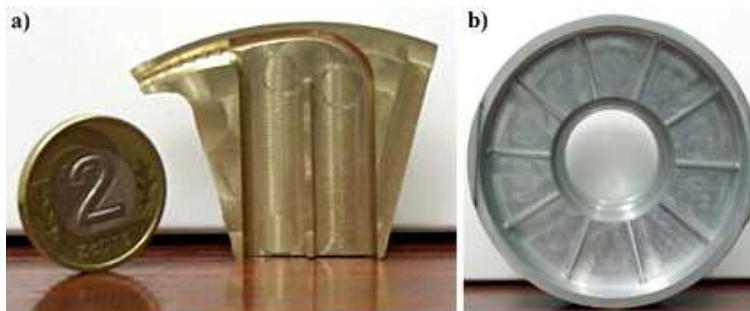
Photos of the bucket (a) and the drum's disk (b) of the rotor-jet pump of the PCz 95.7 type [26].
